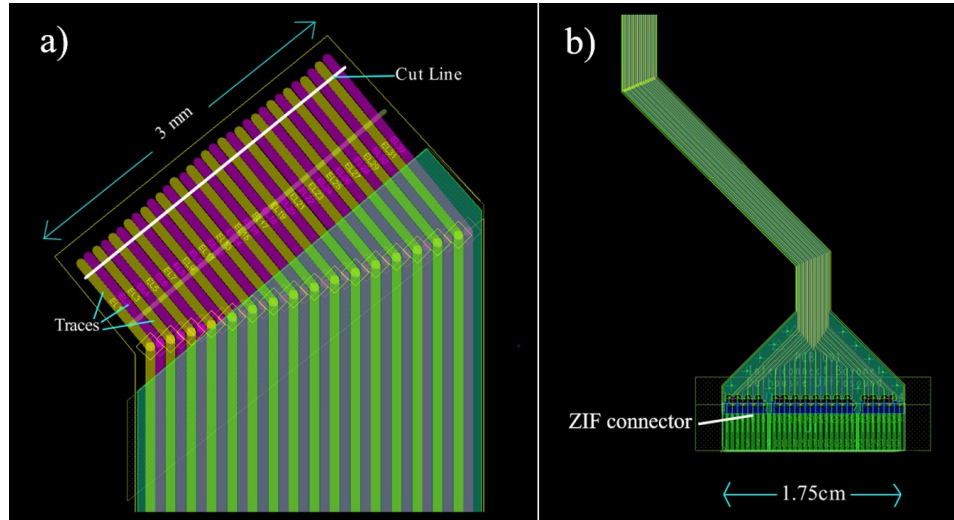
Enlarged view of the PCB depicting the a) traces and the angled tip and b) the bayonet bend and the ZIF connector.
